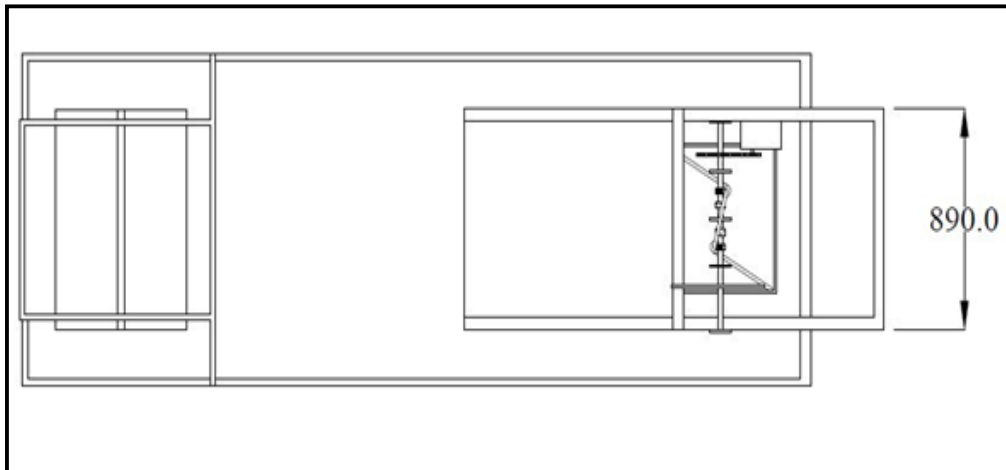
CAD drawing of the Final Prototype model of WEC – Top View
